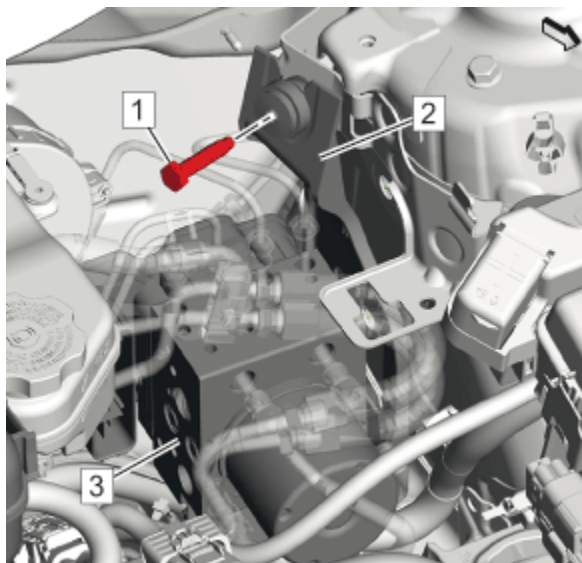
Brake Pressure Modulator Valve, Bracket And Bolt
